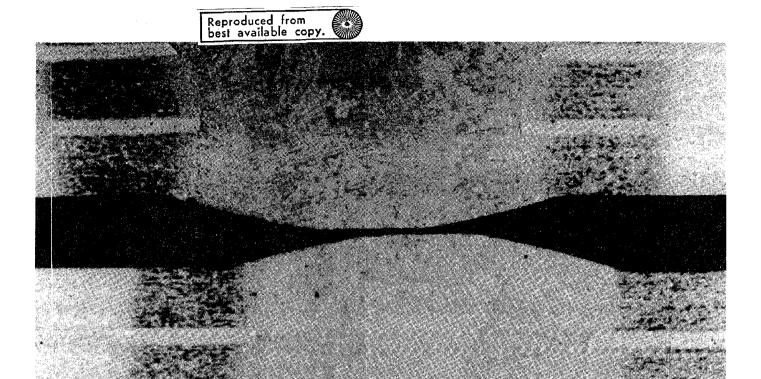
Weld in 0.008 In. Interlayer Laminate Aluminum Plate (20X Magnification)
